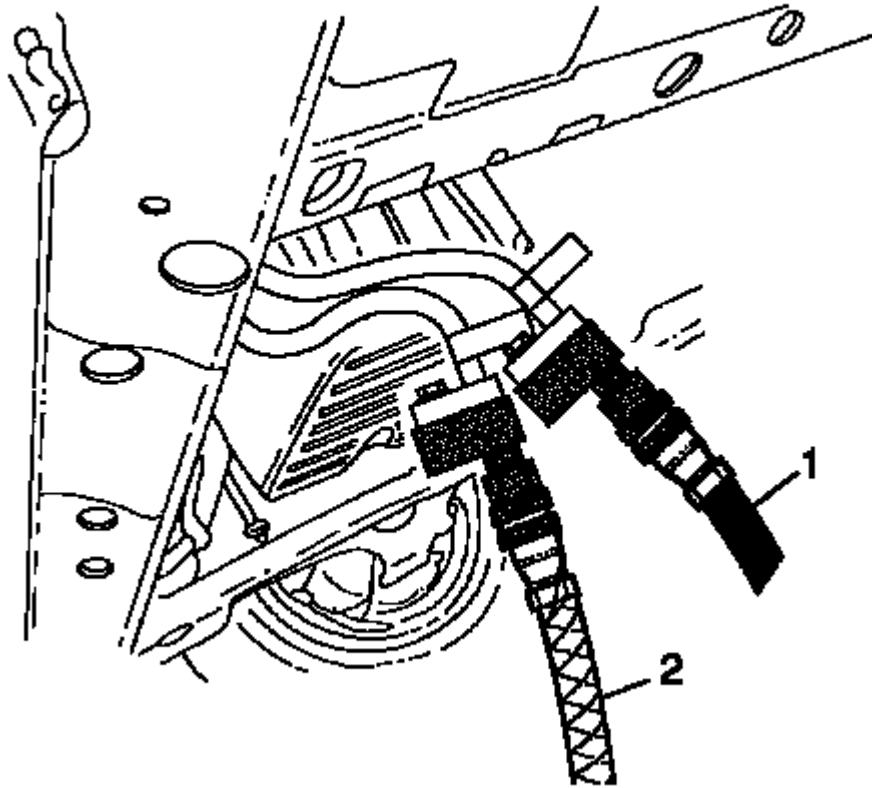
View Of Black Supply Hose And Clear Waste Hose
